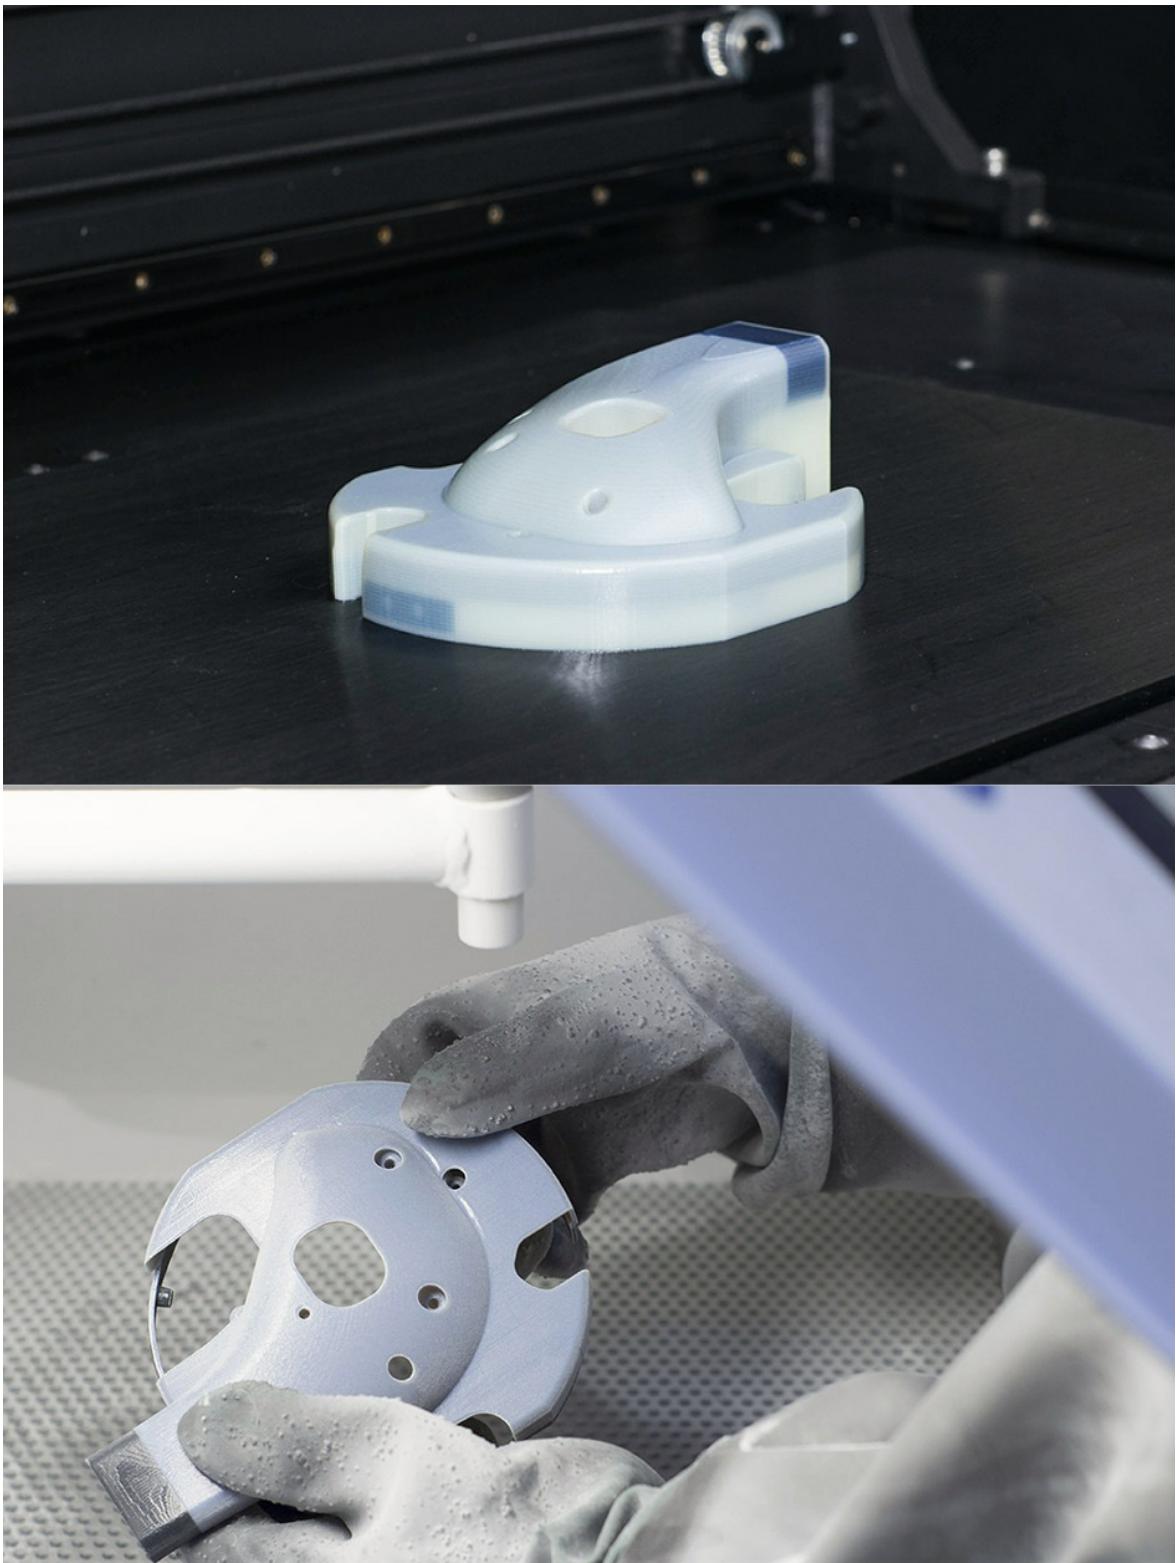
A matte printed fan housing covered in support material (top). The fan housing after support removal and post processing (bottom)
